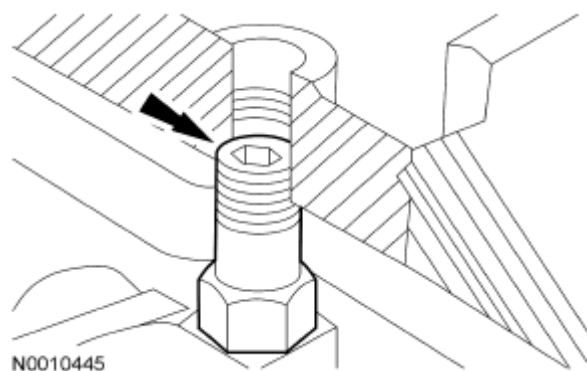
Locating Cylinder Block Cradle Rear Torx® Bolts
